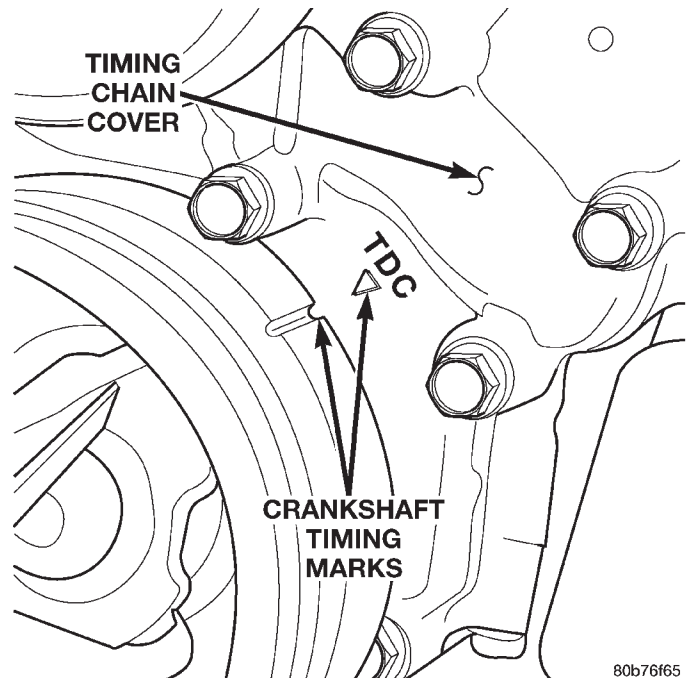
Engine Top Dead Center (TDC) Indicator Mark
